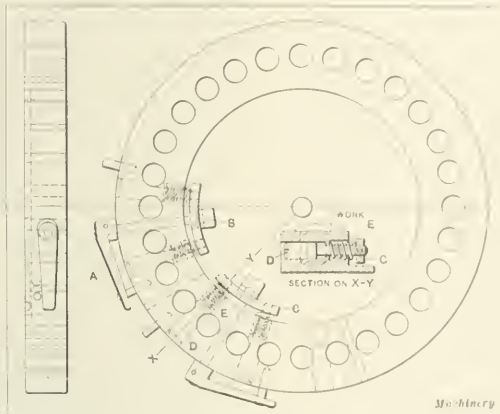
Special Fixture for holding Twenty-eight Bushings on Heald Rotary Surface Grinder for grinding Top Face of Flange
